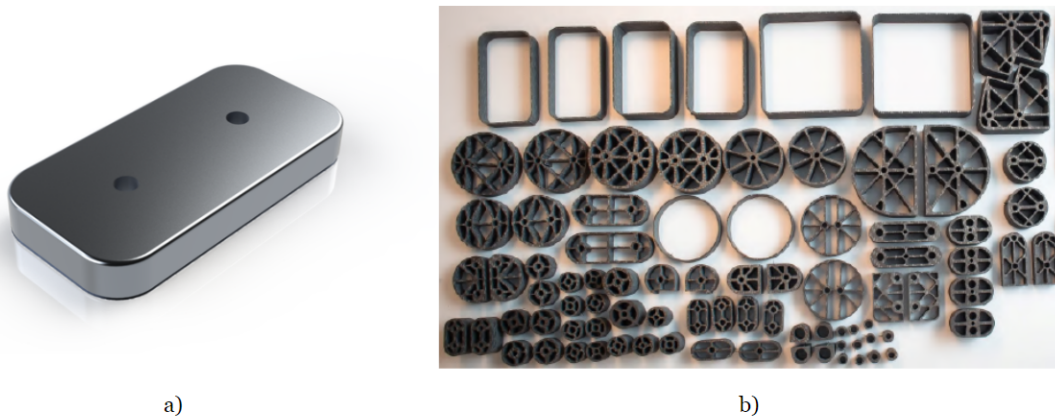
Inserts examples: a) Aluminium insert, b) NTNU waterjet cut optimized inserts, adapted from [29]
